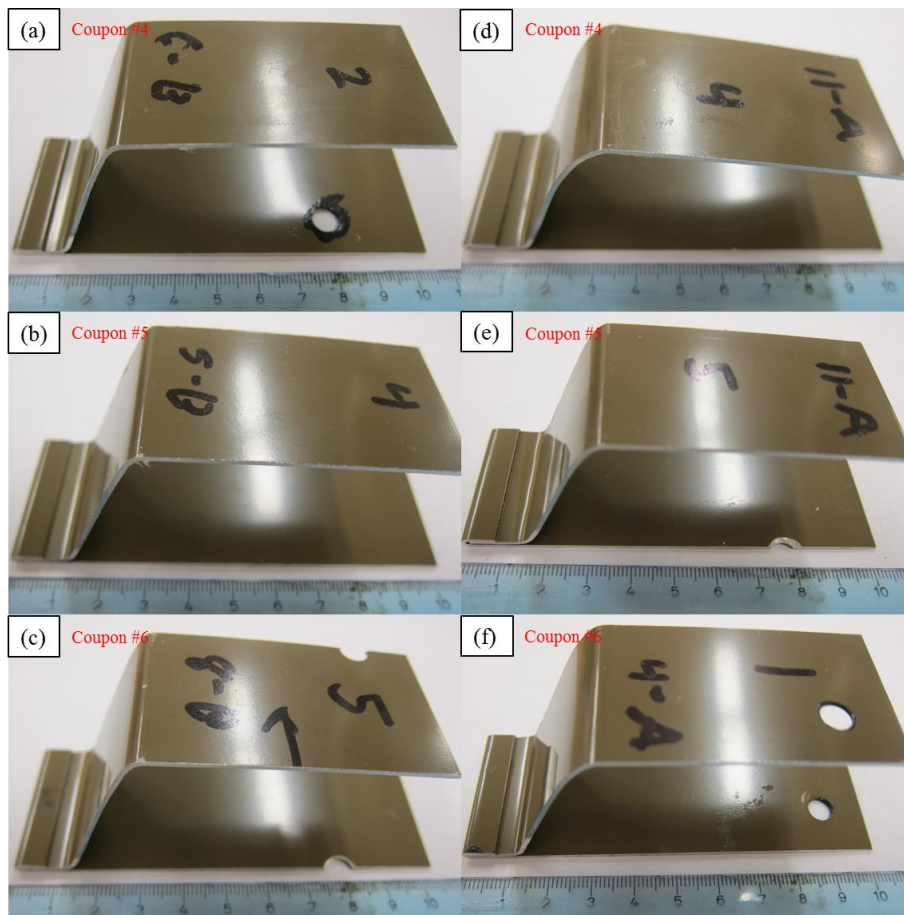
Photographs of previously corroded (Ford L-3190 for six weeks) hem flange coupons (#4-6) of (a)-(c) AA6022 and (d)-(f) AA6111.
